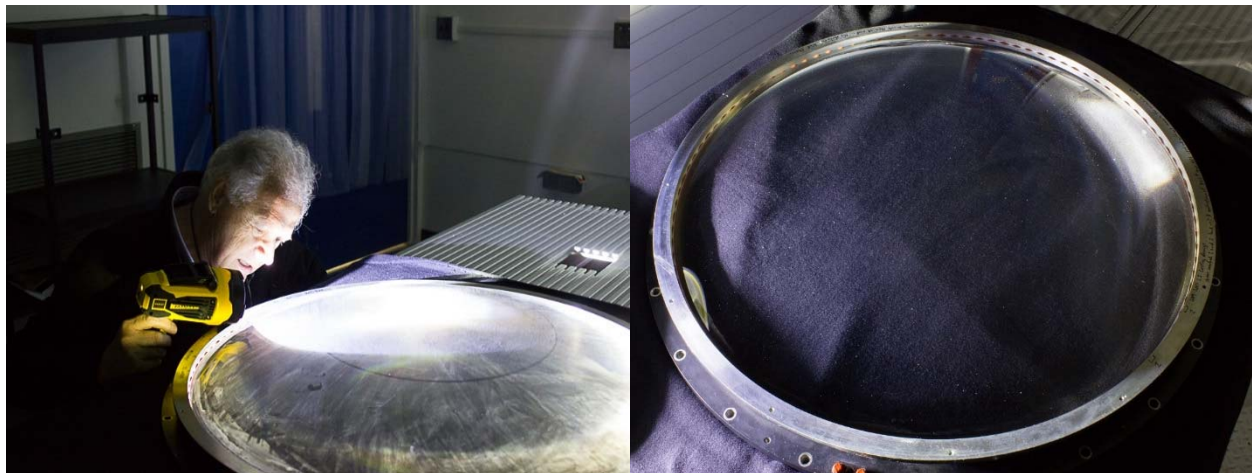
Left, Director of Engineering Derrick Salmon inspects a heavily pitted AO coating on a MegaCam lens. Right, that same lens after the AR coating was removed through the use of a mild acid wash.
